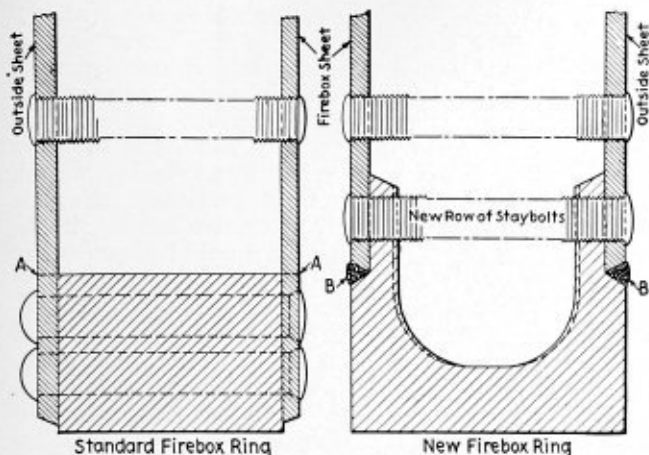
Standard firebox ring construction (left)—replaced by new ring (right)
